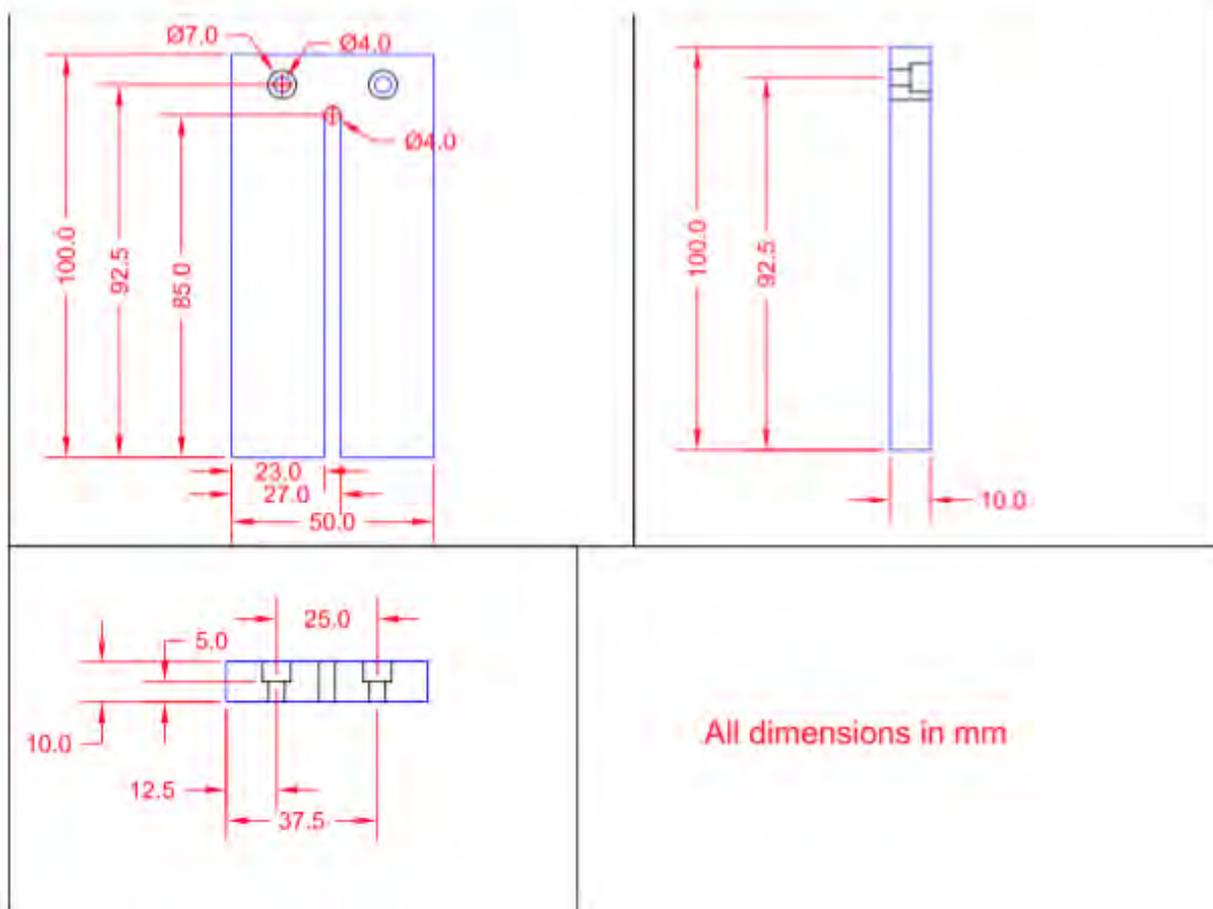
Construction apparatus: Technical drawing of the horizontal piece. It is attached to the vertical piece to allow it sliding on the base.
